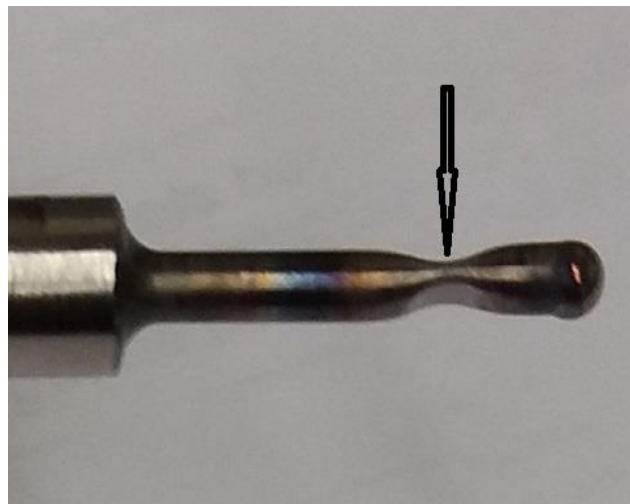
1 CpTi fill tube welded onto the SLM Ti6Al4V tube
